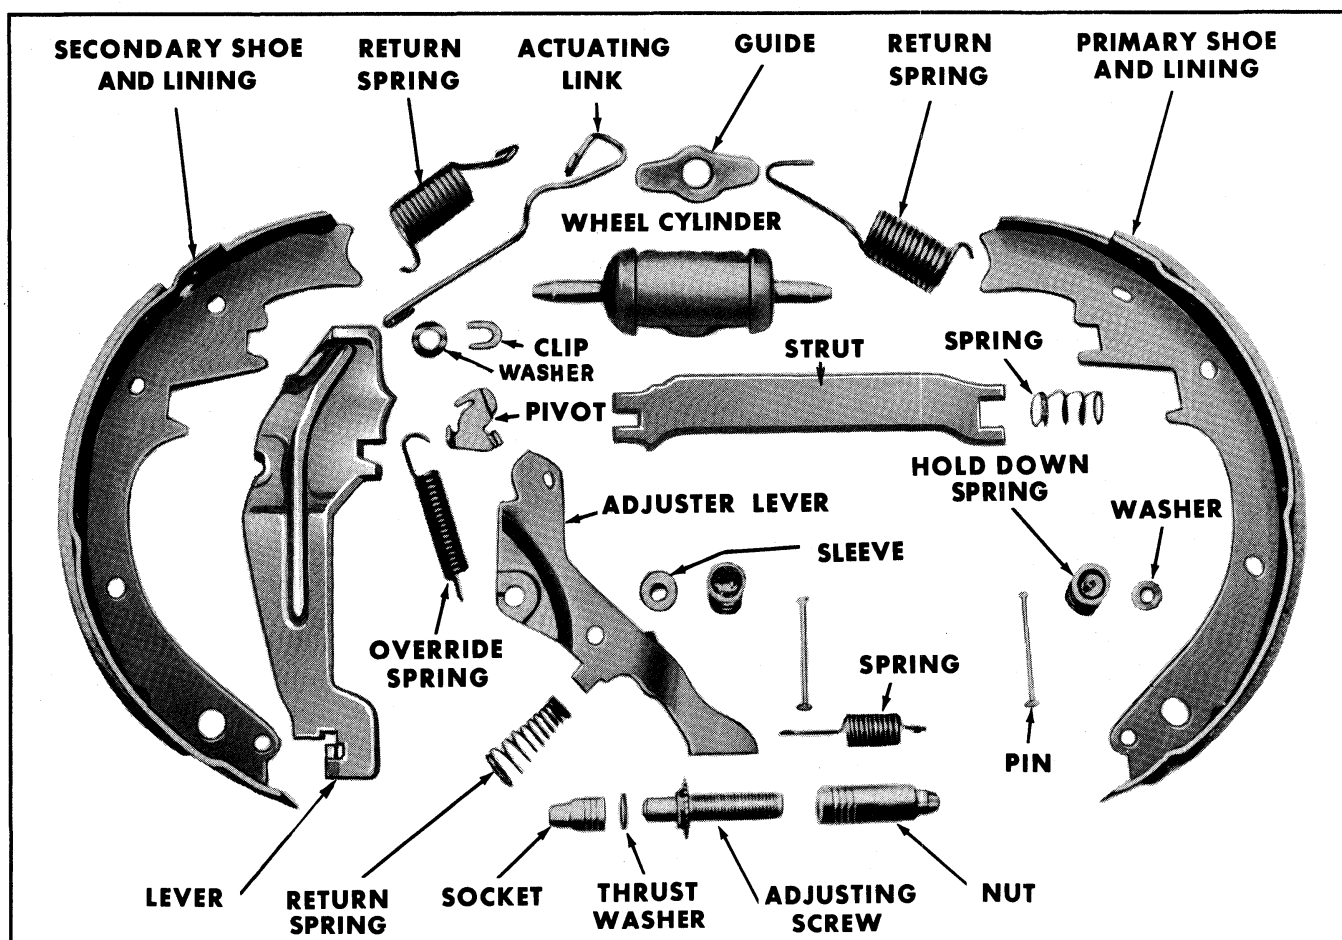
Self-Adjusting Brake Assembly-Exploded View
